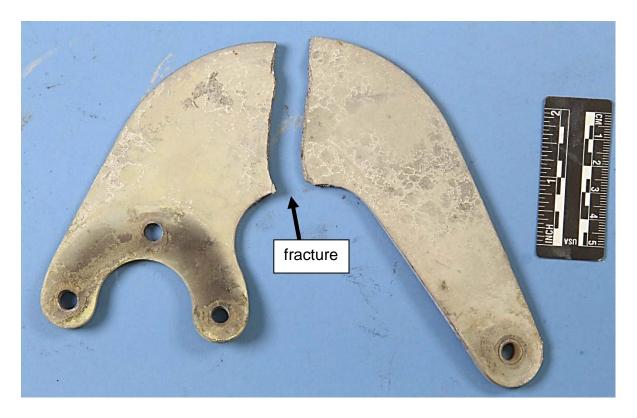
Photograph of the as-received elevator bell crank that contained a fracture.
